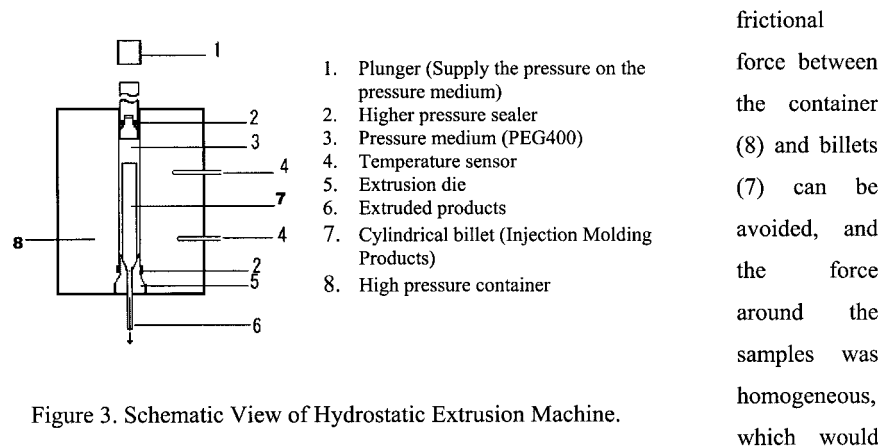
Schematic View of Hydrostatic Extrusion Machine.
